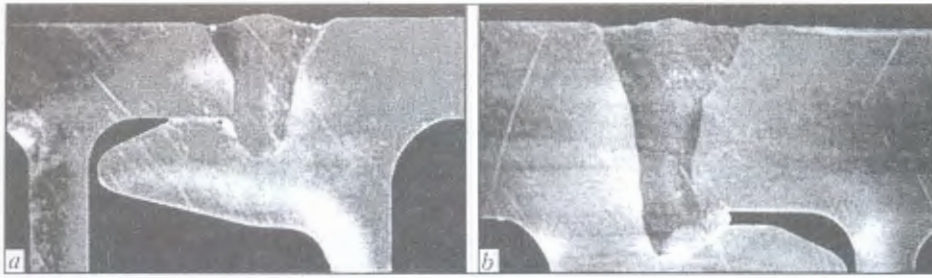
First fibre laser GMA-hybrid welds (EN-AW 6008, $t = 4$ (a) and 8 (b) mm)
